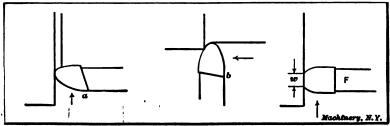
Top of Tool should Slope away from Working Part of Cutting Edge
